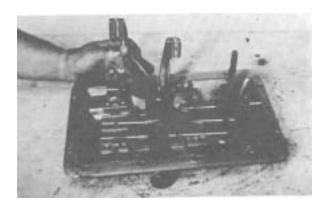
Remove the 4th and 5th shift fork and rail assembly.
